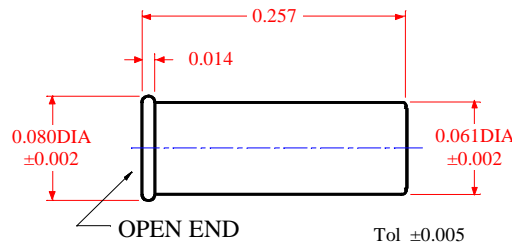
RO Socket # 9741/ 9741LF Mechanical Dimensions
